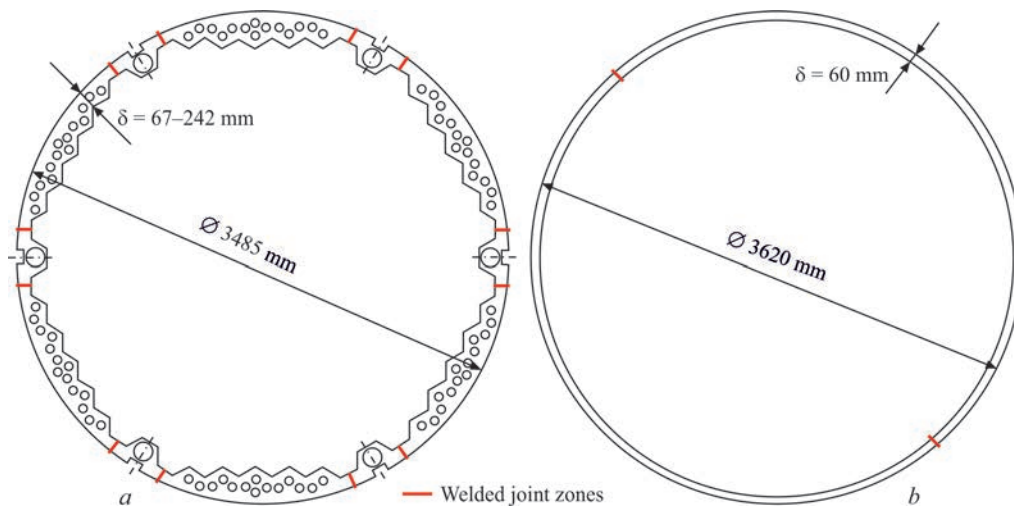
Layout of longitudinal welded joints in the RS (a) and IC (b) cross-section
